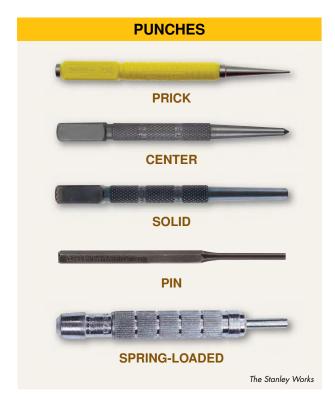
A punch is a hand tool with a pointed or blunt tip for marking or making holes or driving objects when struck by a hammer.
